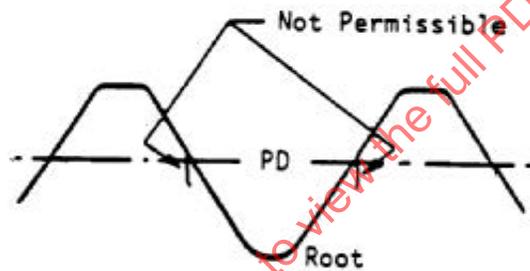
Laps Below PD Extending Toward Root, Rolled Thread
